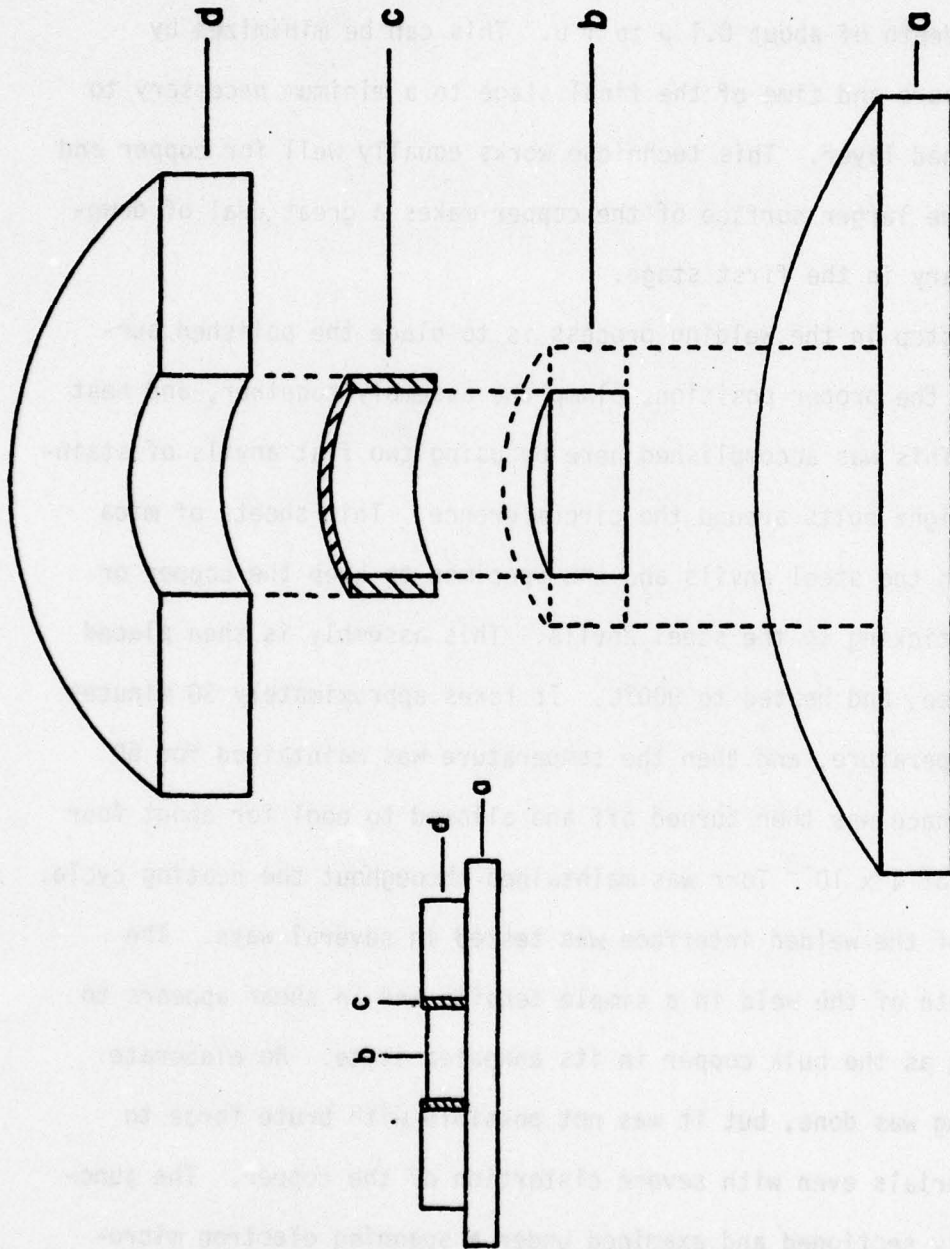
Exploded View of Target Assembly. (a) Copper buffer, (b) Constantan, (c) Ceramic Insulator, (d) Copper Guard Ring.
